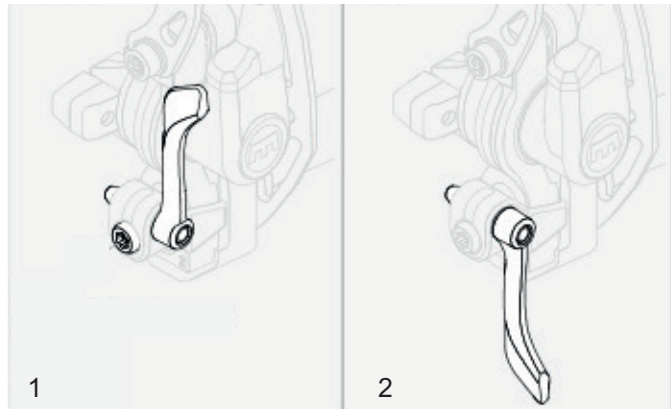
Rim brake locking lever, closed (1) and open (2)
